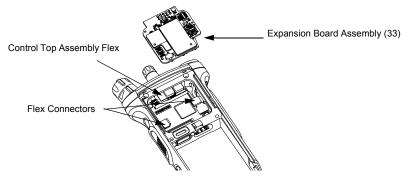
Remove Flex Connectors and Expansion Board Assembly
